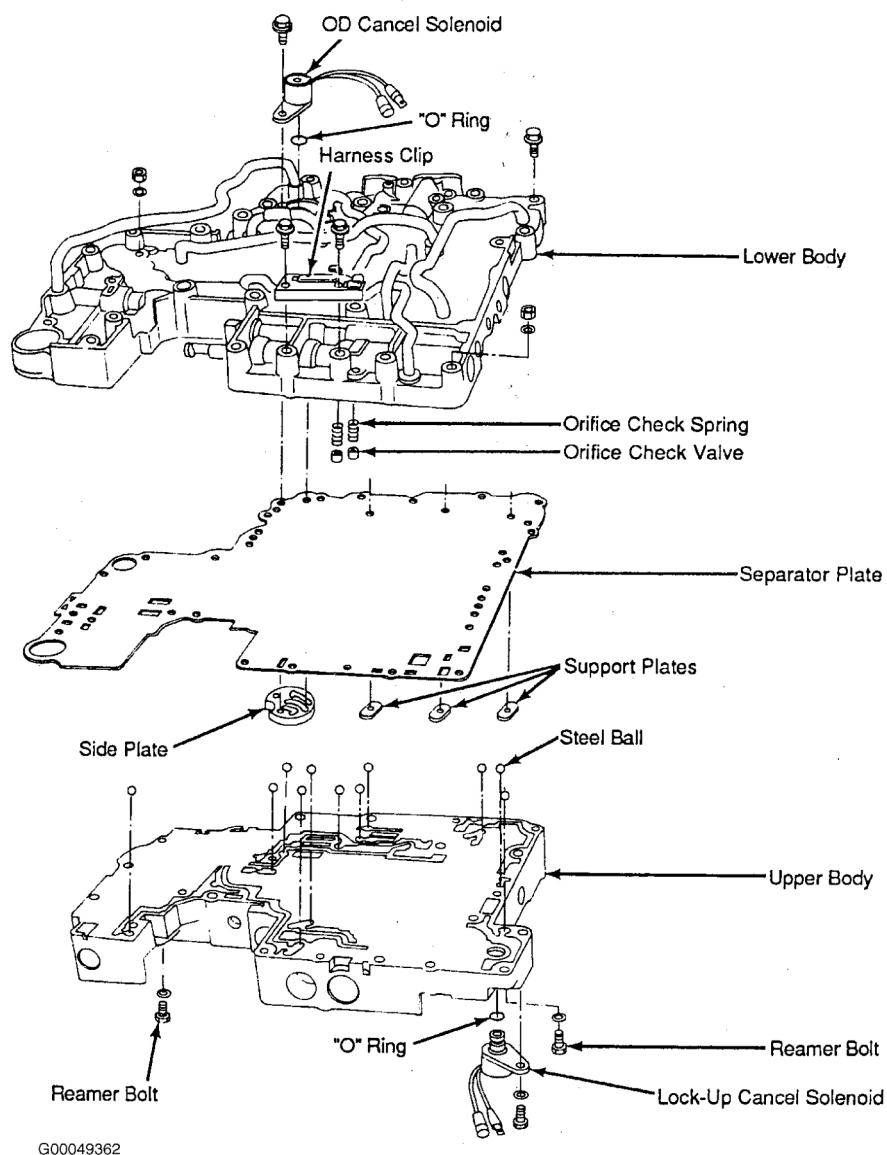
Exploded View Of Control Valve Assembly (RL4R01A)
